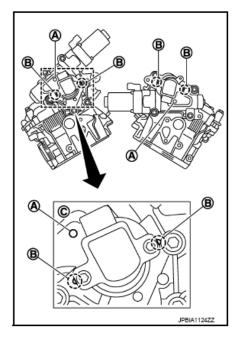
Identifying VVEL Control Shaft Position Sensor And Upper Housing Matching Marks
